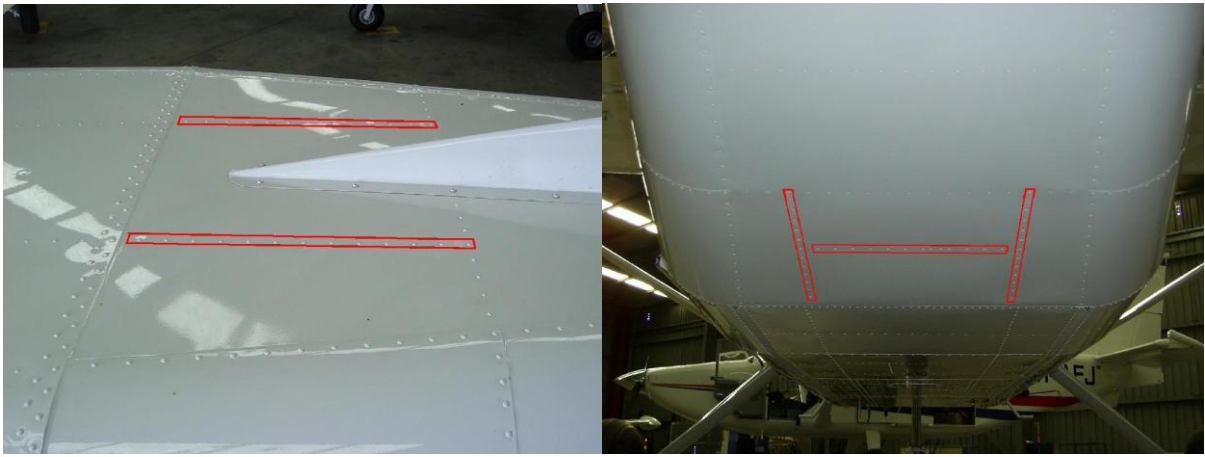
Remove 2 rivet rows from tailcone upper skin and 3 rows of rivets from Tailcone lower skin area below baggage shelf.
